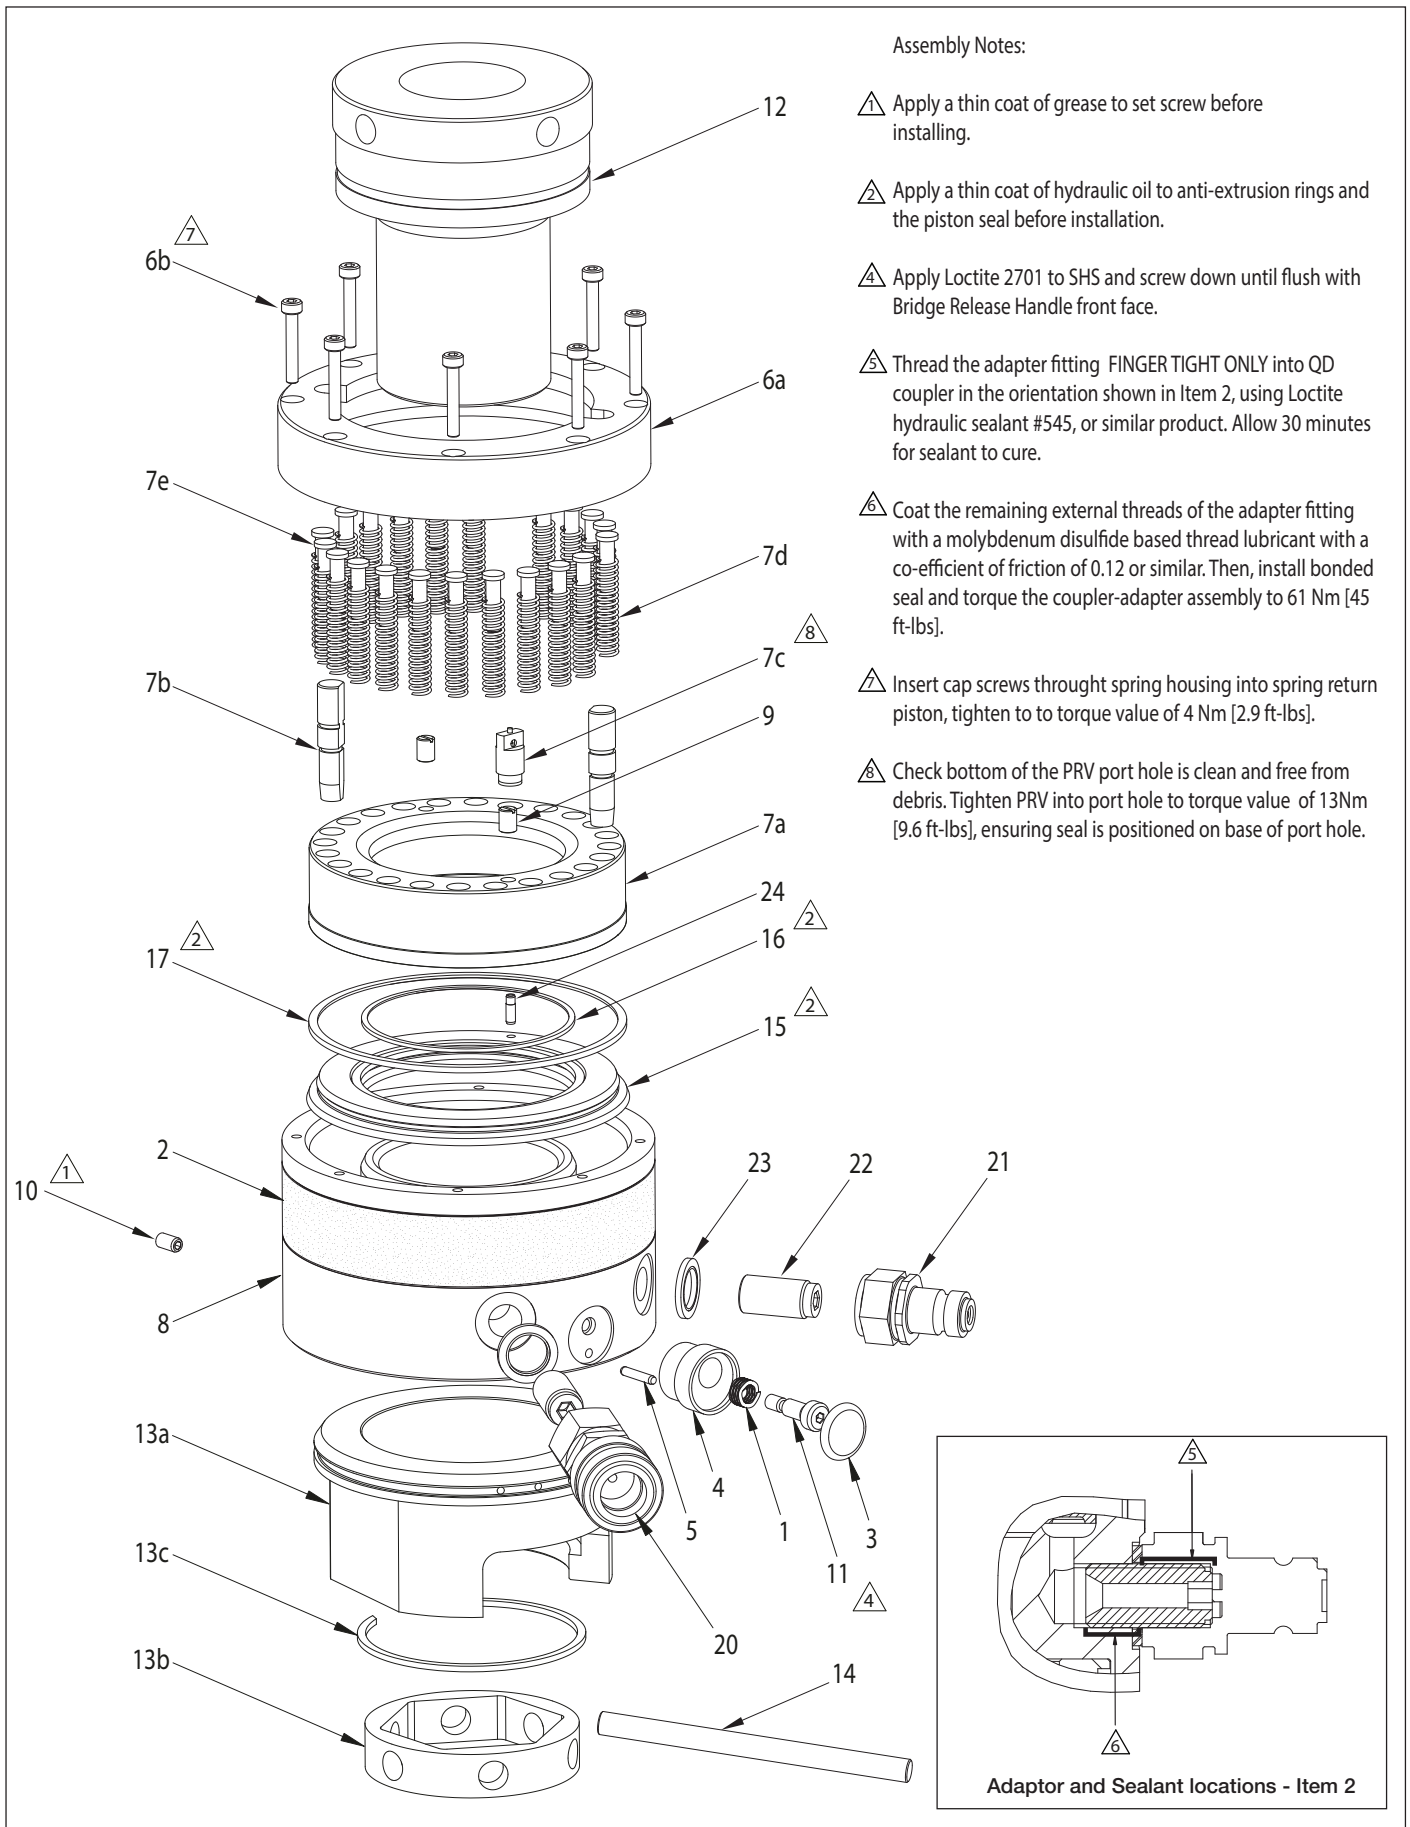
, Exploded View, HydraMax® Series Hydraulic Tensioner (Models HM06, HM07)
